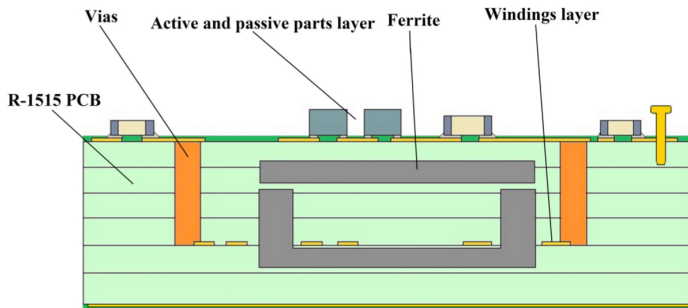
Schematic of the power supply with PCB embedded transformer.
